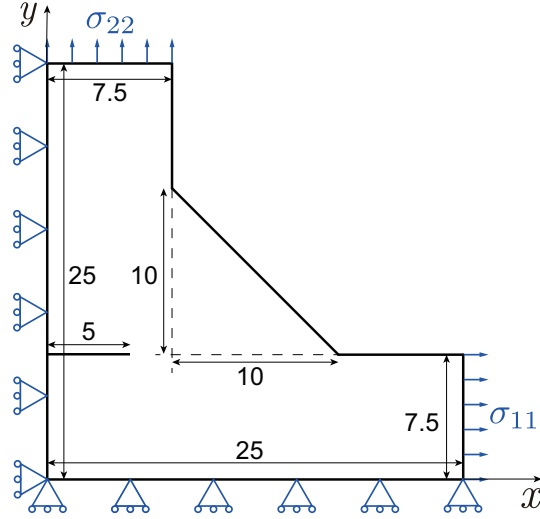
Layout and geometry of a weld joint structure (unit: mm).
